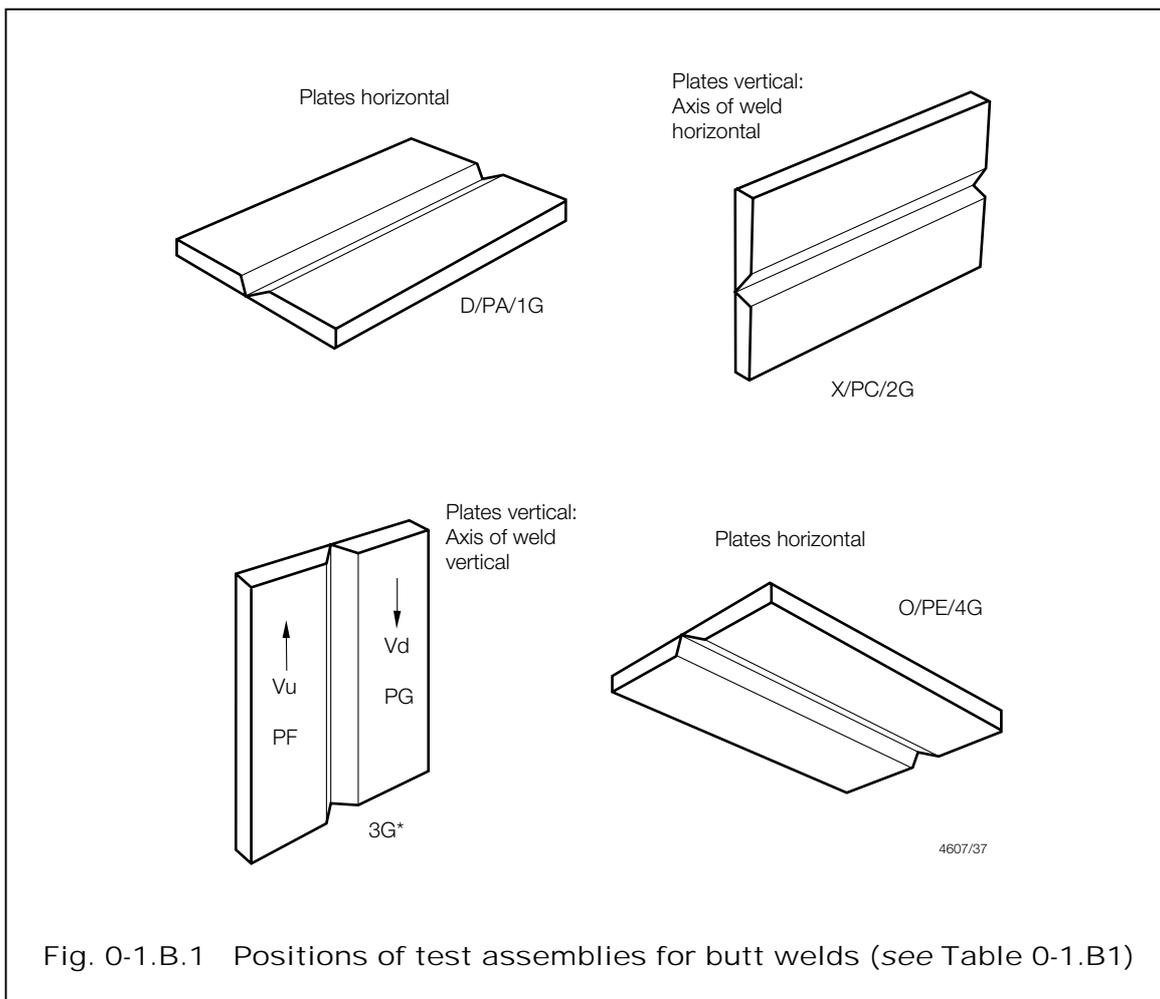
B.1 Positions of test assemblies for butt welds (see Table 0-1.B1)
